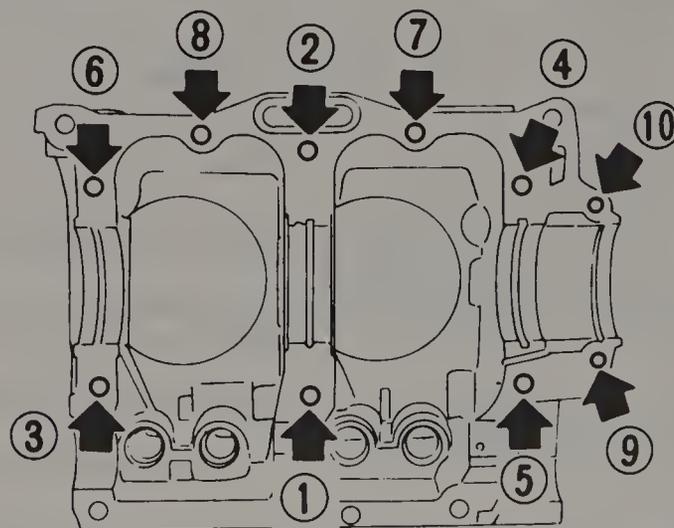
Crankcase bolt tightening sequence (Sec 29)
